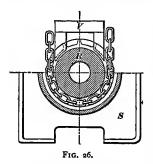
is a detail view of one of the chain wheels R, with the chain guide S and stripper V, showing the manner in which the chain is guided during its contact with the wheel, and the provision, by means of the stripper V, for compelling it to leave the wheel R at the proper point in whichever direction the wheel is being turned. The slack part of the chain, after passing over the guide sheave T, falls into
